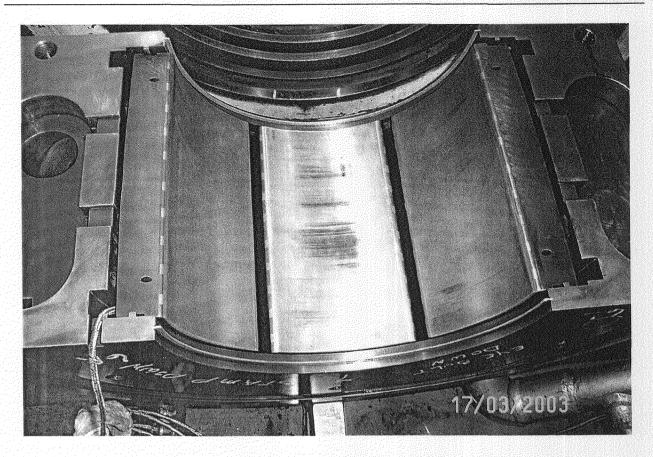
OLD INLET GLAND SHOWING HEAVY BOTTOM RUBS
